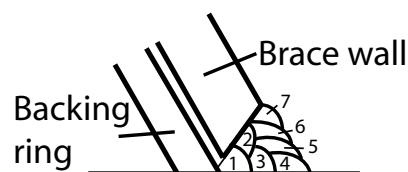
The order of the seven weld passes to form the full weld.
